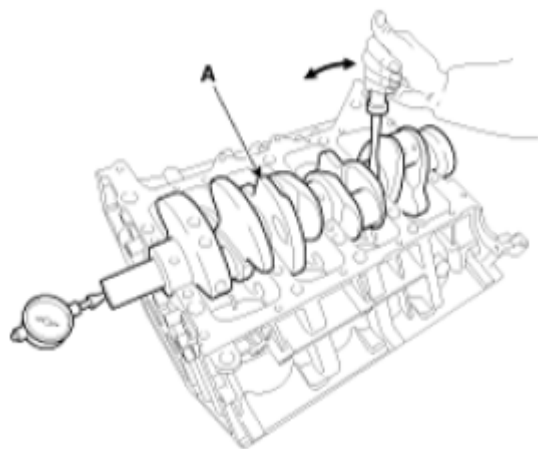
Measuring Thrust Clearance Using Dial Indicator
